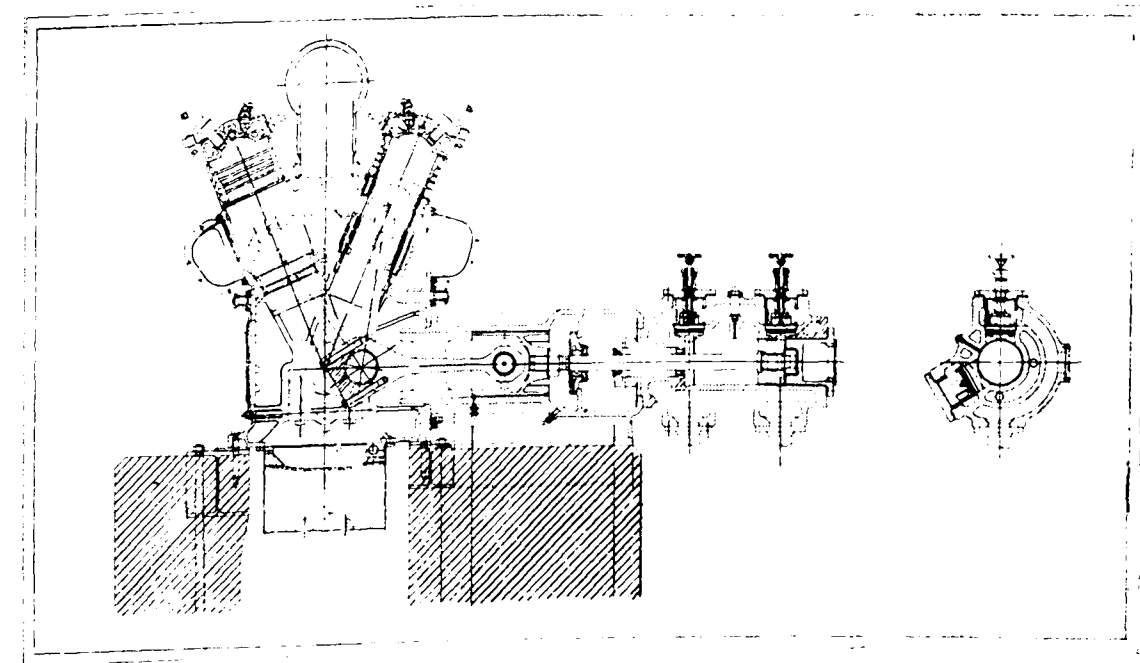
Basic design of a gas-engine driven compressor in the form of a 12-cylinder motor of V-arrangement with hung-on compressor cylinders.
